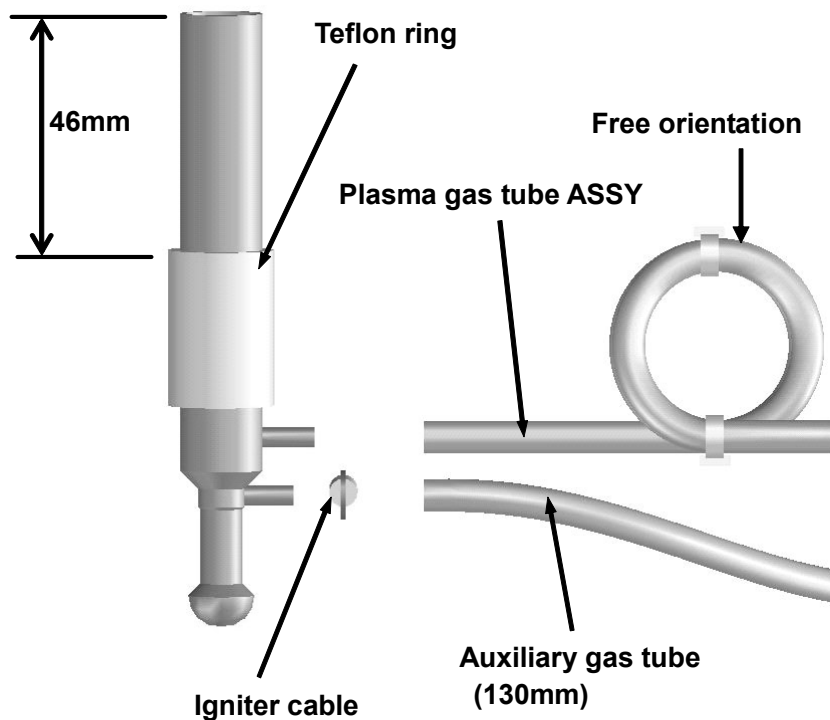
Attaching Gas Tubes, Igniter Cable, and Teflon Ring
